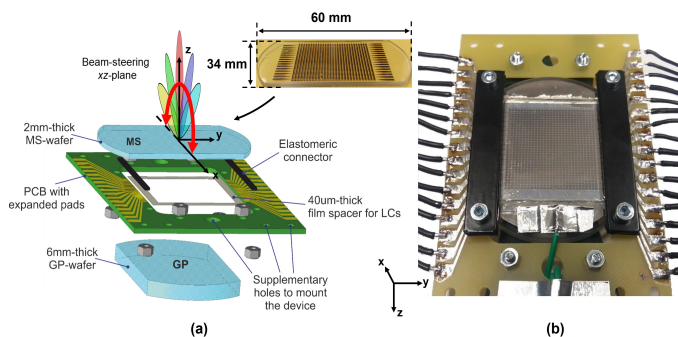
Schematic representation of the manufactured RA: (a) Isometric exploded view of all the pieces composing the RA and showing in the center the PCB used to realize the bias connection. Inset, front view of the 2-mm-thick quartz wafer with active patches (MS) and contact pads, which has a size of 34 mm by 60 mm. (b) Photo of the assembled device prepared for connection to a 33-channel voltage generator.
